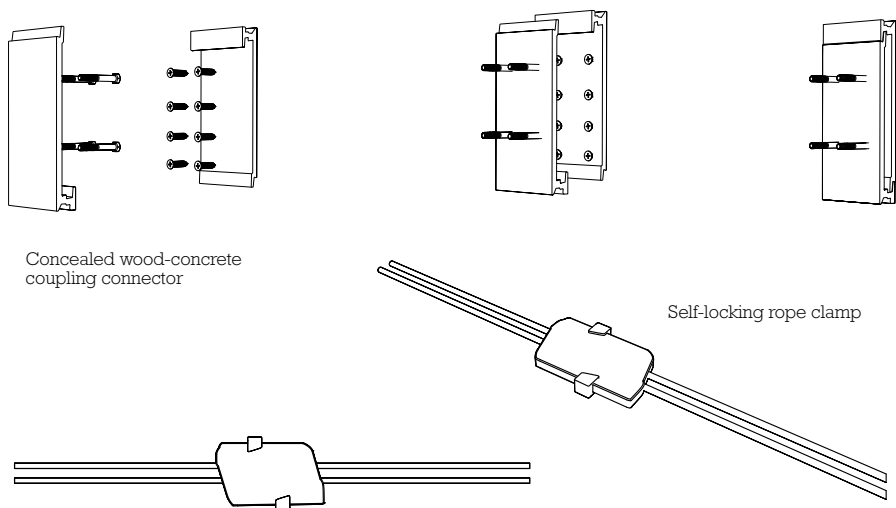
Construction detail - Shelving joints | Axonometric views and exploded views.
